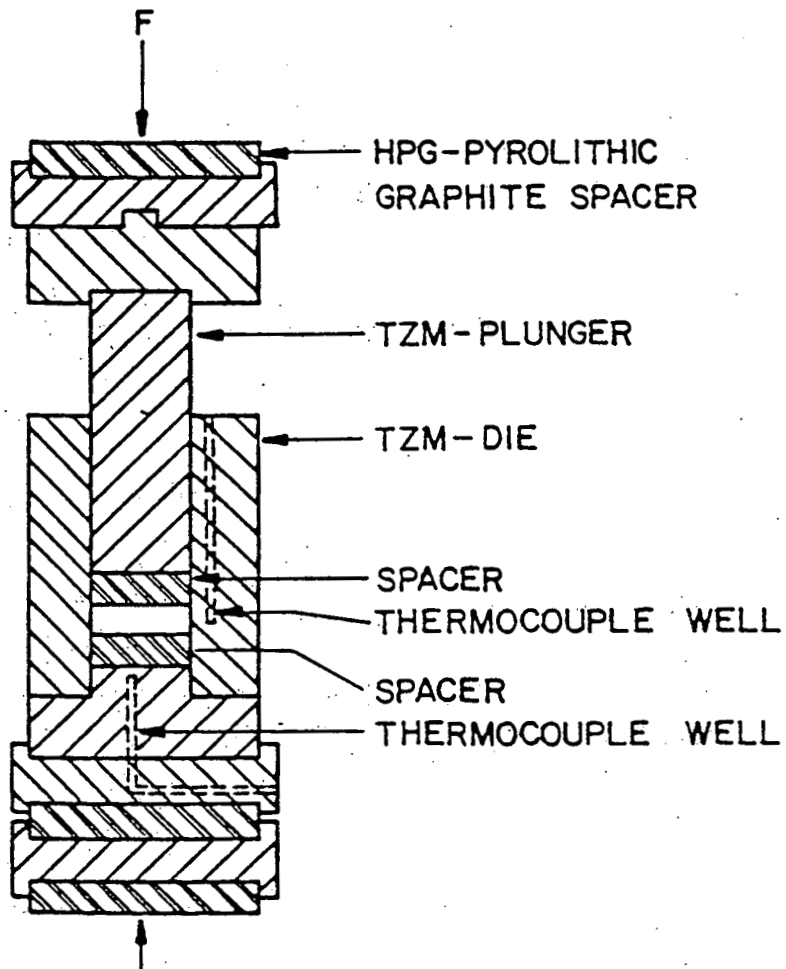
"TZM" Molybdenum alloy hot-pressing die.
